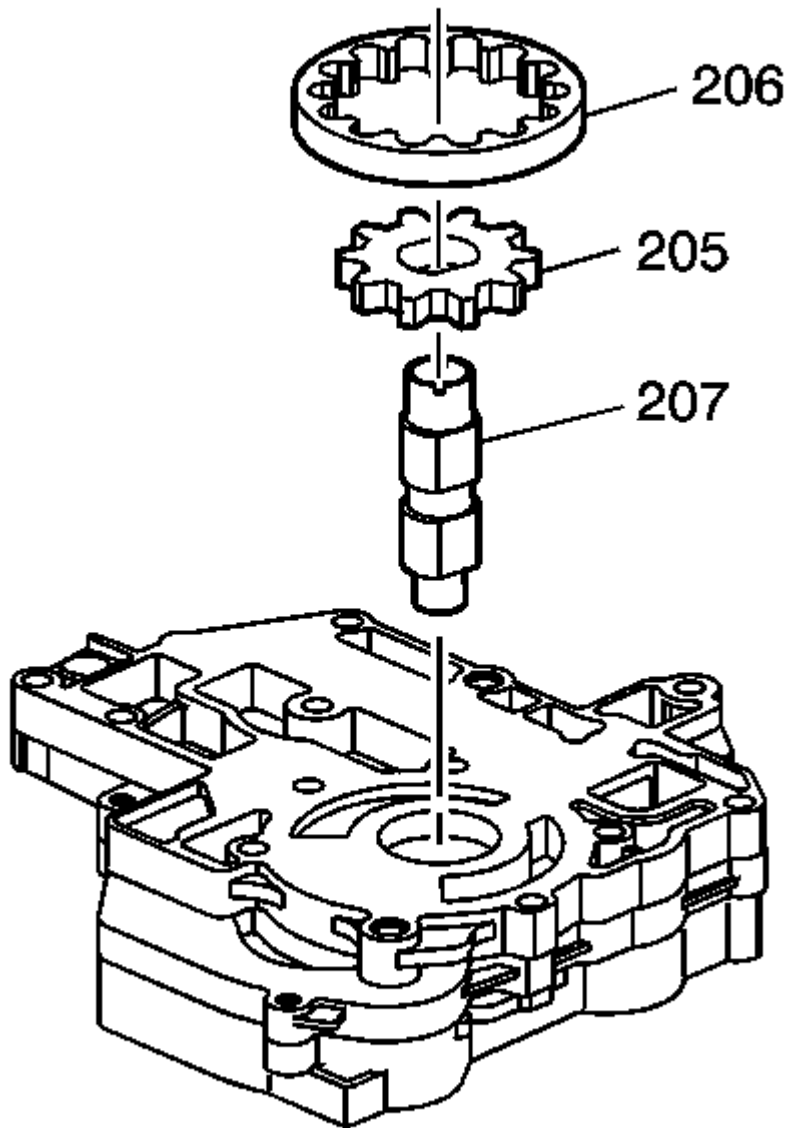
View Of Oil Pump Drive Shaft & Secondary Pump Gears
